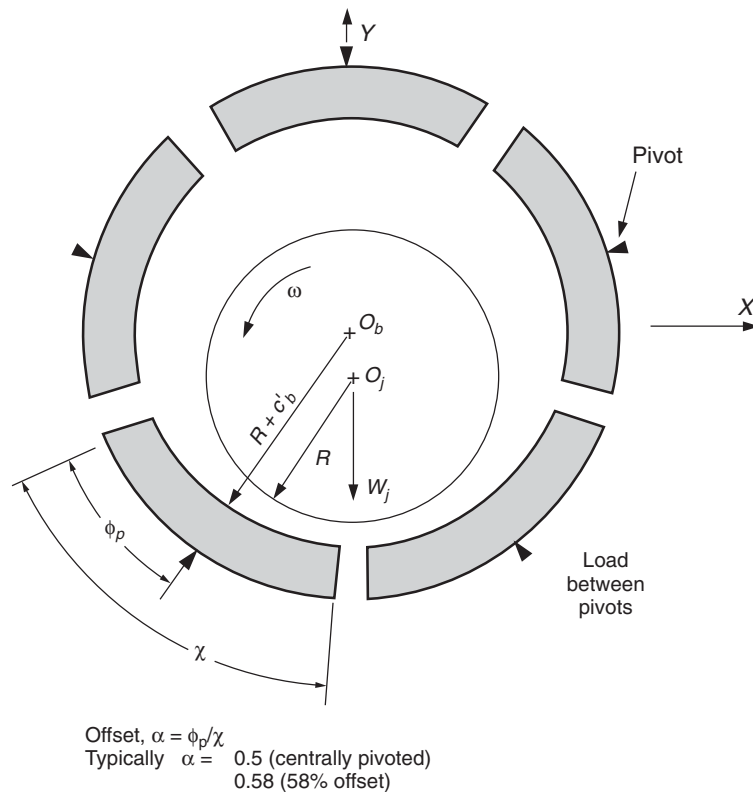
Five-pad Tilting Pad Bearing Schematic
